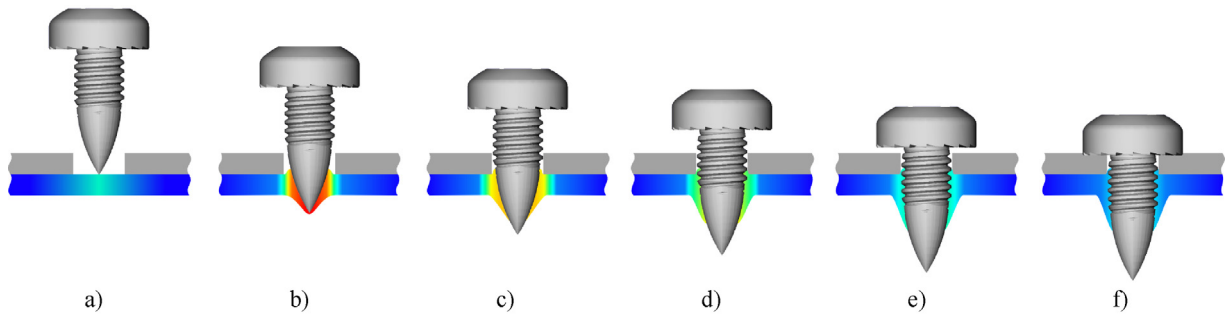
Different stages of the flow-drill screw process. (a) warming up. (b) penetration of the material. (c) forming of the draught. (d) thread forming. (e) full thread engagement. (f) tightening.
